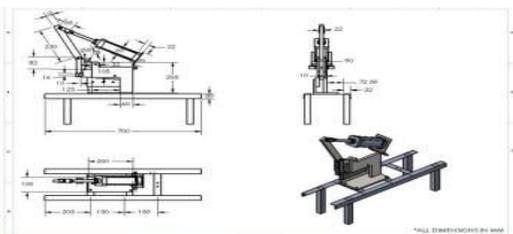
(Top Final Assembly; (Bottom)Final Assembly CAD model
